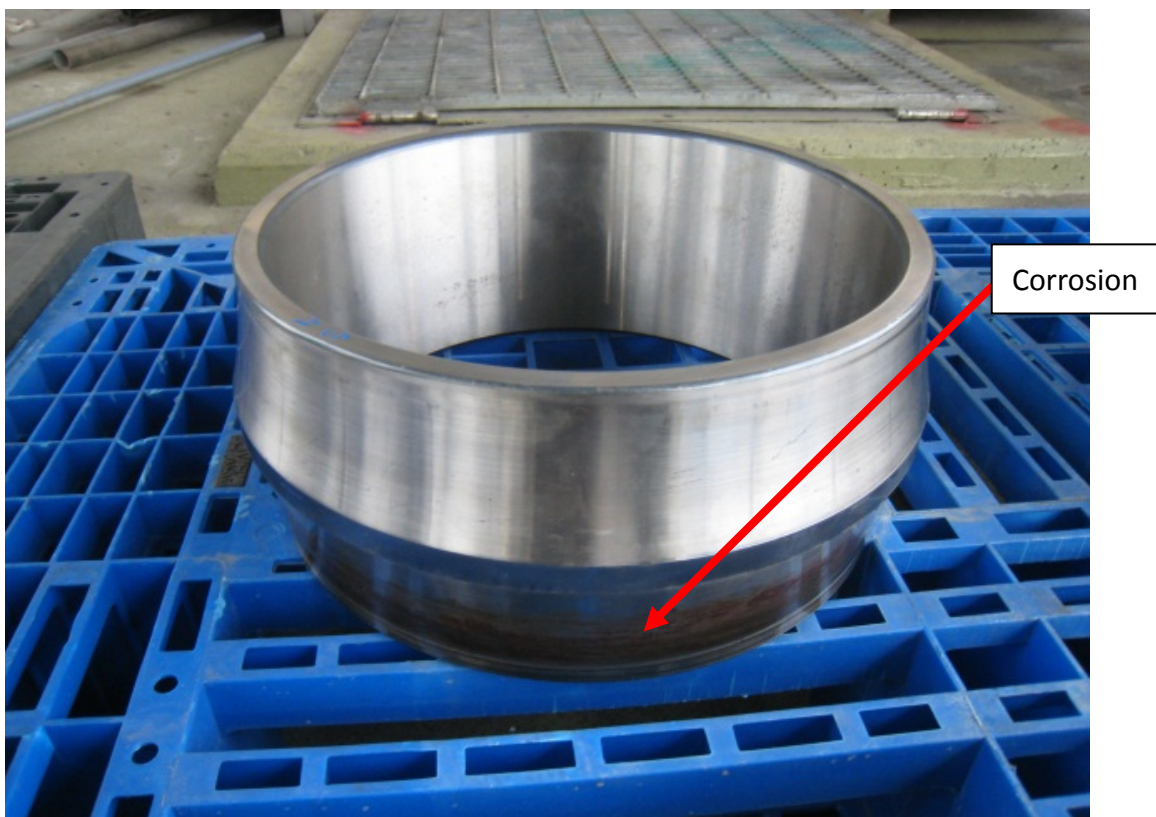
Corrosion in the bottom raceway of the inner ring of the upper bearing
